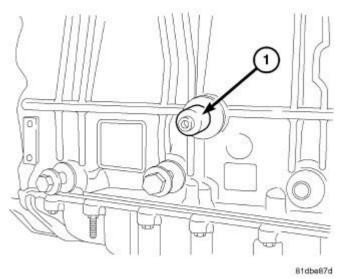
CRANKSHAFT LOCKING TOOL Courtesy of CHRYSLER LLC
